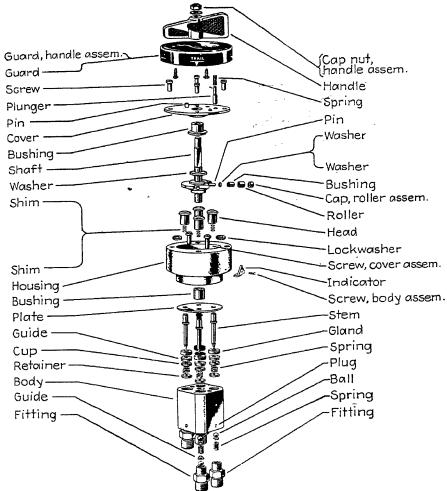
Valve assembly. Cowling flap. (Courtesy of Douglas Aircraft Co.)
